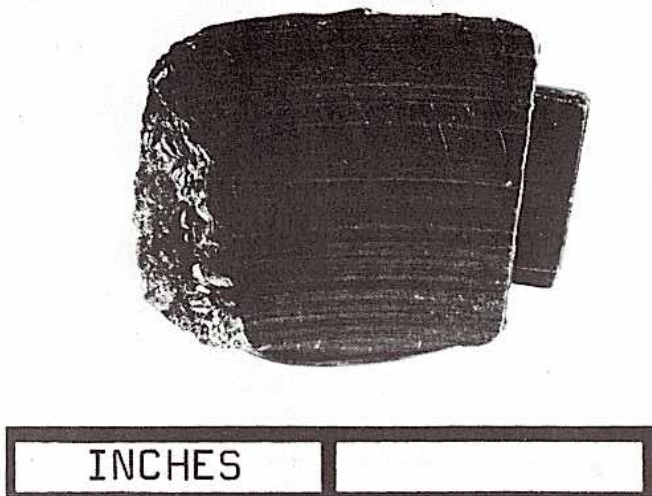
Surface wiping of whitemetal lined pad, in successive thin layers due to excessive steady load at start-up.
